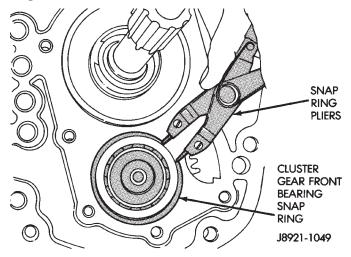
Removing Cluster Gear Front Bearing Snap Ring
